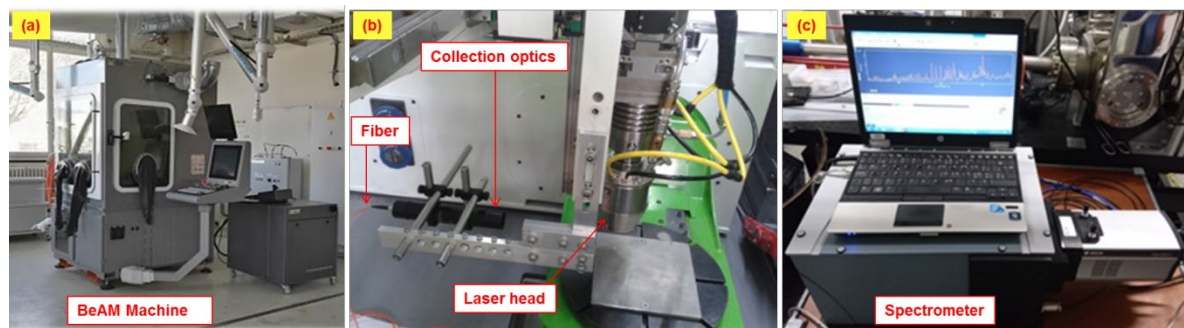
(a) Photograph of BeAM machine used to fabricate three dimensional (3D) Ti-6Al-4V parts by direct laser melting of feedstock powder; (b) Photograph of Laser head of BeAM machine, and collection optics with fiber mounted with the laser head; and (c) photograph of spectrometer used to record emission spectra from melt pool and plume.
